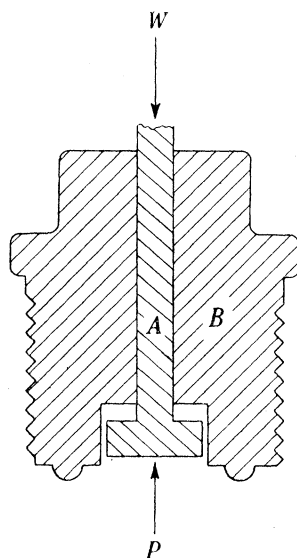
Diagram of a piston and cylinder assembly for a free-piston gauge.
